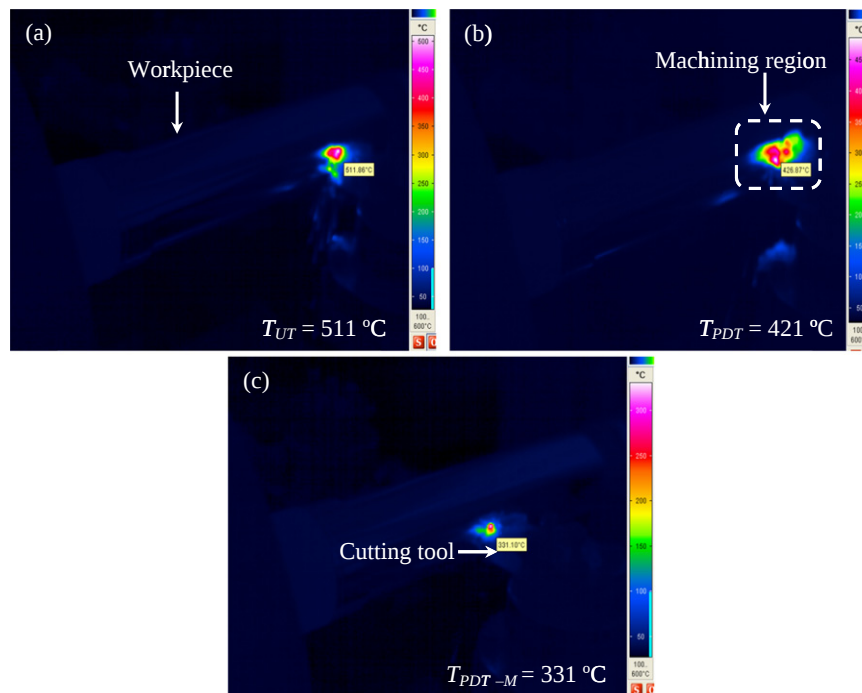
Thermal images showing temperature while machining using: (a) Un-textured tool, (b) uncoated perpendicular textured tool and (c) MoS₂ coated perpendicular self-lubricating tool. Reproduced from Gajrani, K.K., Suresh, S., Sankar, M.R., 2018a. "Environmental friendly hard machining performance of uncoated and MoS₂ coated mechanical micro-textured tungsten carbide cutting tools". Tribology International 125, 141–155. doi:10.1016/j.triboint.2018.04.031.
